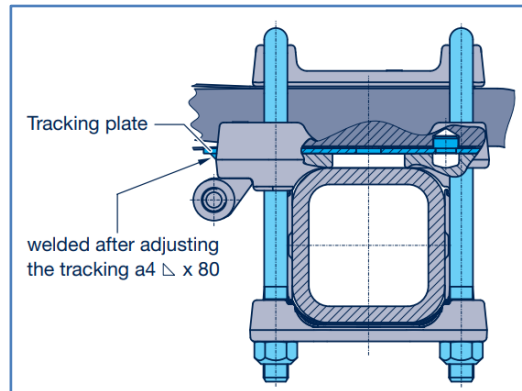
Illustration of the position of the tracking plate on the axle assembly
